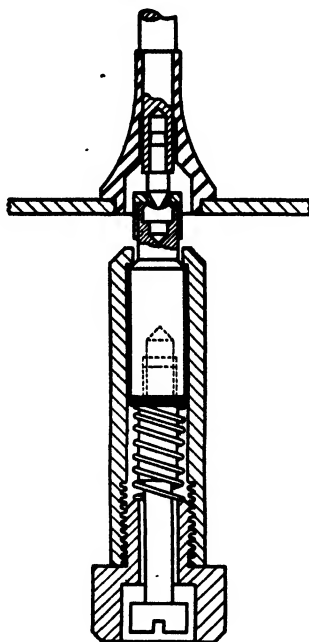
(b).—Bottom bearing in Ferranti single-phase meter.
